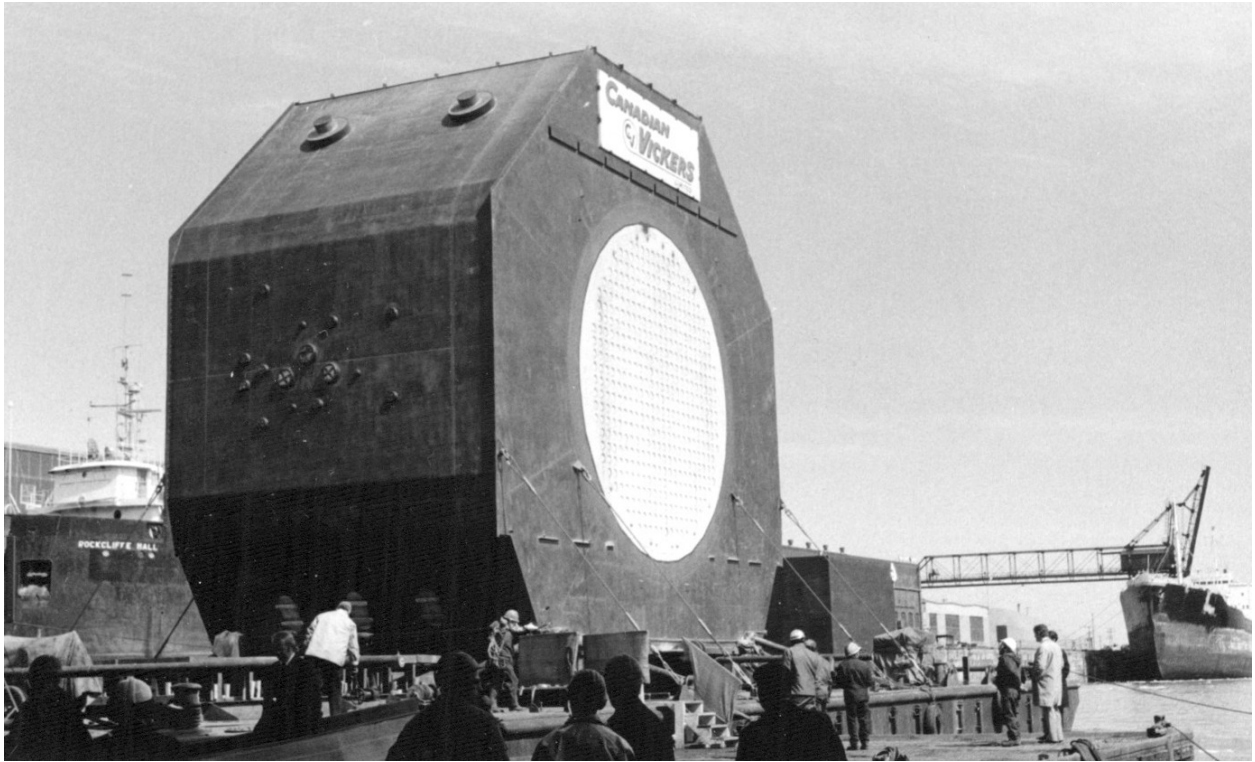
Calandria and shield tank assembly on a barge going through the Welland Canal.
